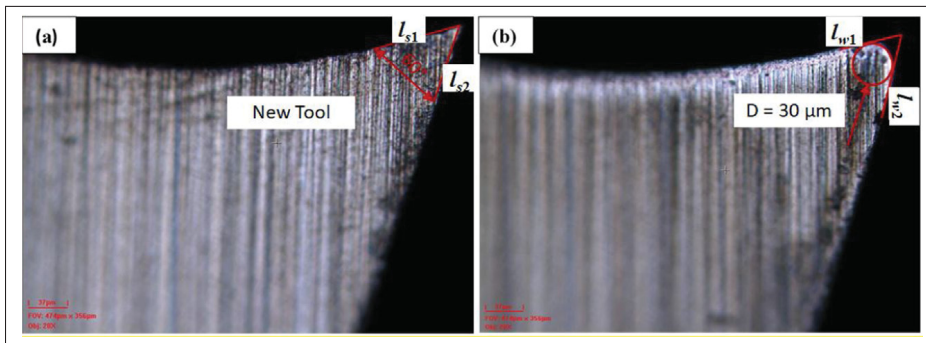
Images of cutting tool, (a) fresh end-mill, (b) corner diameter End-mill
